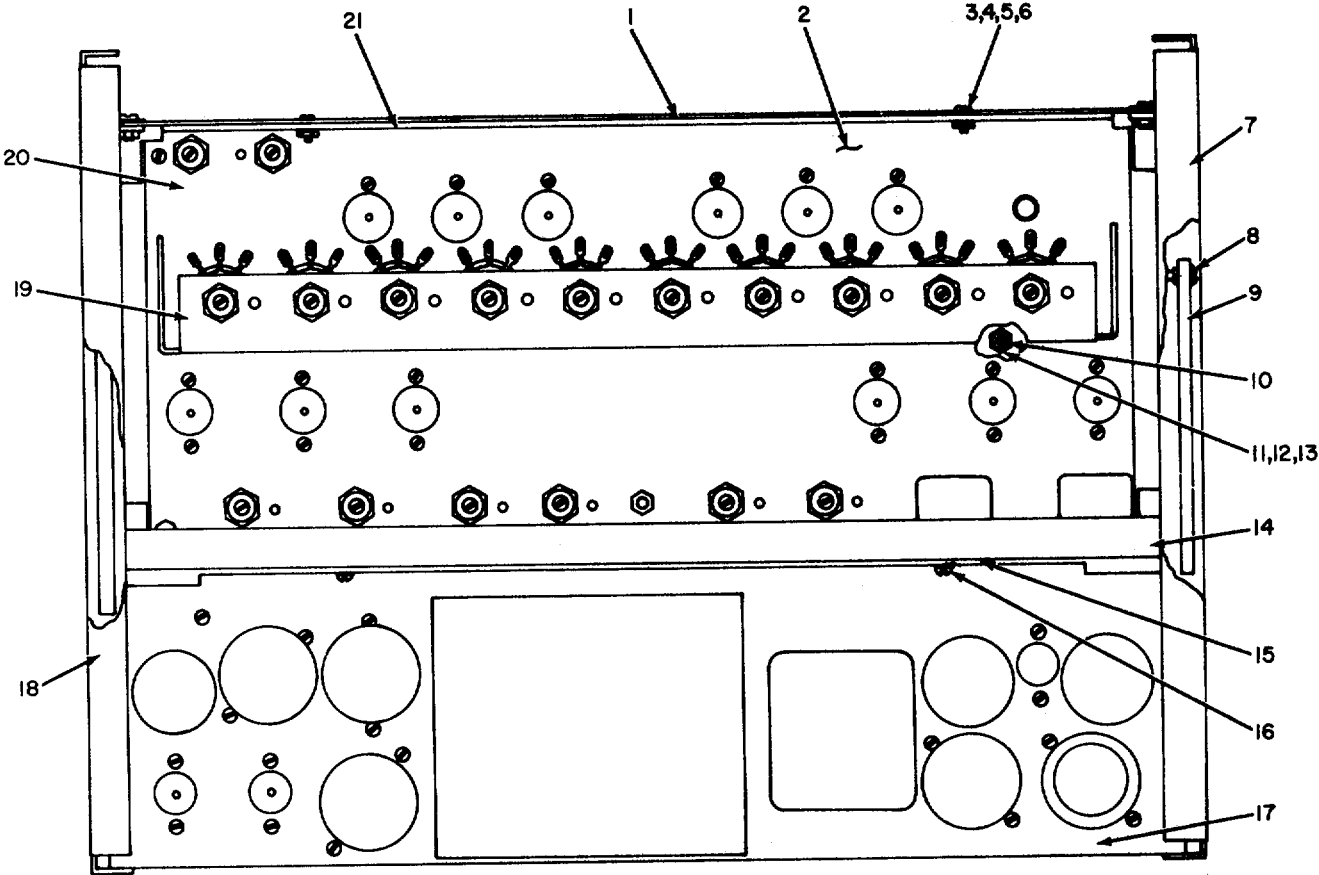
Generator, Signal SG-321B/U, Front Panel Assembly.
